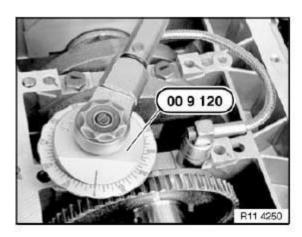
Tightening Main Bearing Bolts Using Special Tool (00 9 120) Courtesy of BMW OF NORTH AMERICA, INC.
